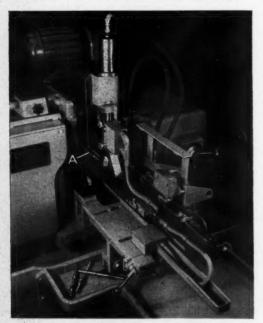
Mounted on a Scrivener No. 3 centreless grinding machine, this transfer attachment enables workpieces to be manually loaded and unloaded at one side of the grinding zone
